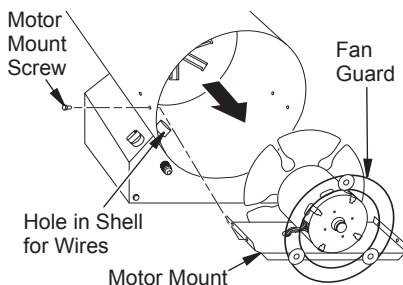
Removing Motor, Motor Mount, and Fan Guard from Heater
